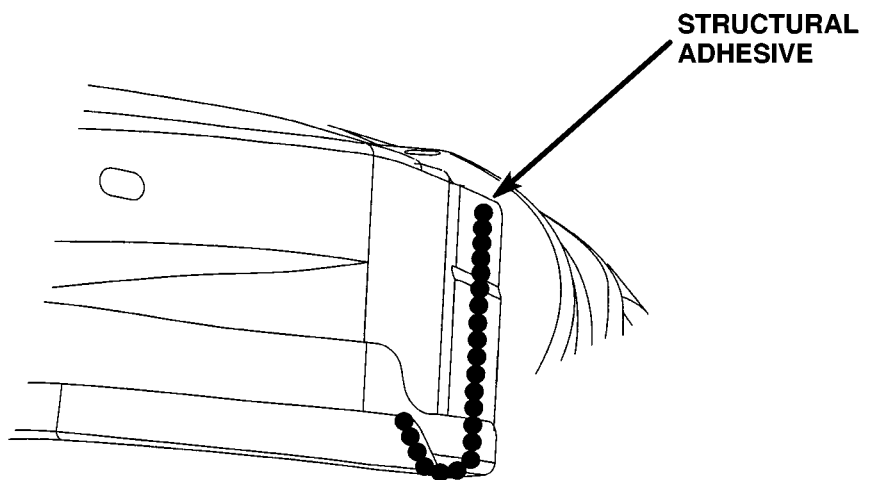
BODY SIDE APERTURE, INNER QUARTER PANEL & WINDSHIELD FRAME
